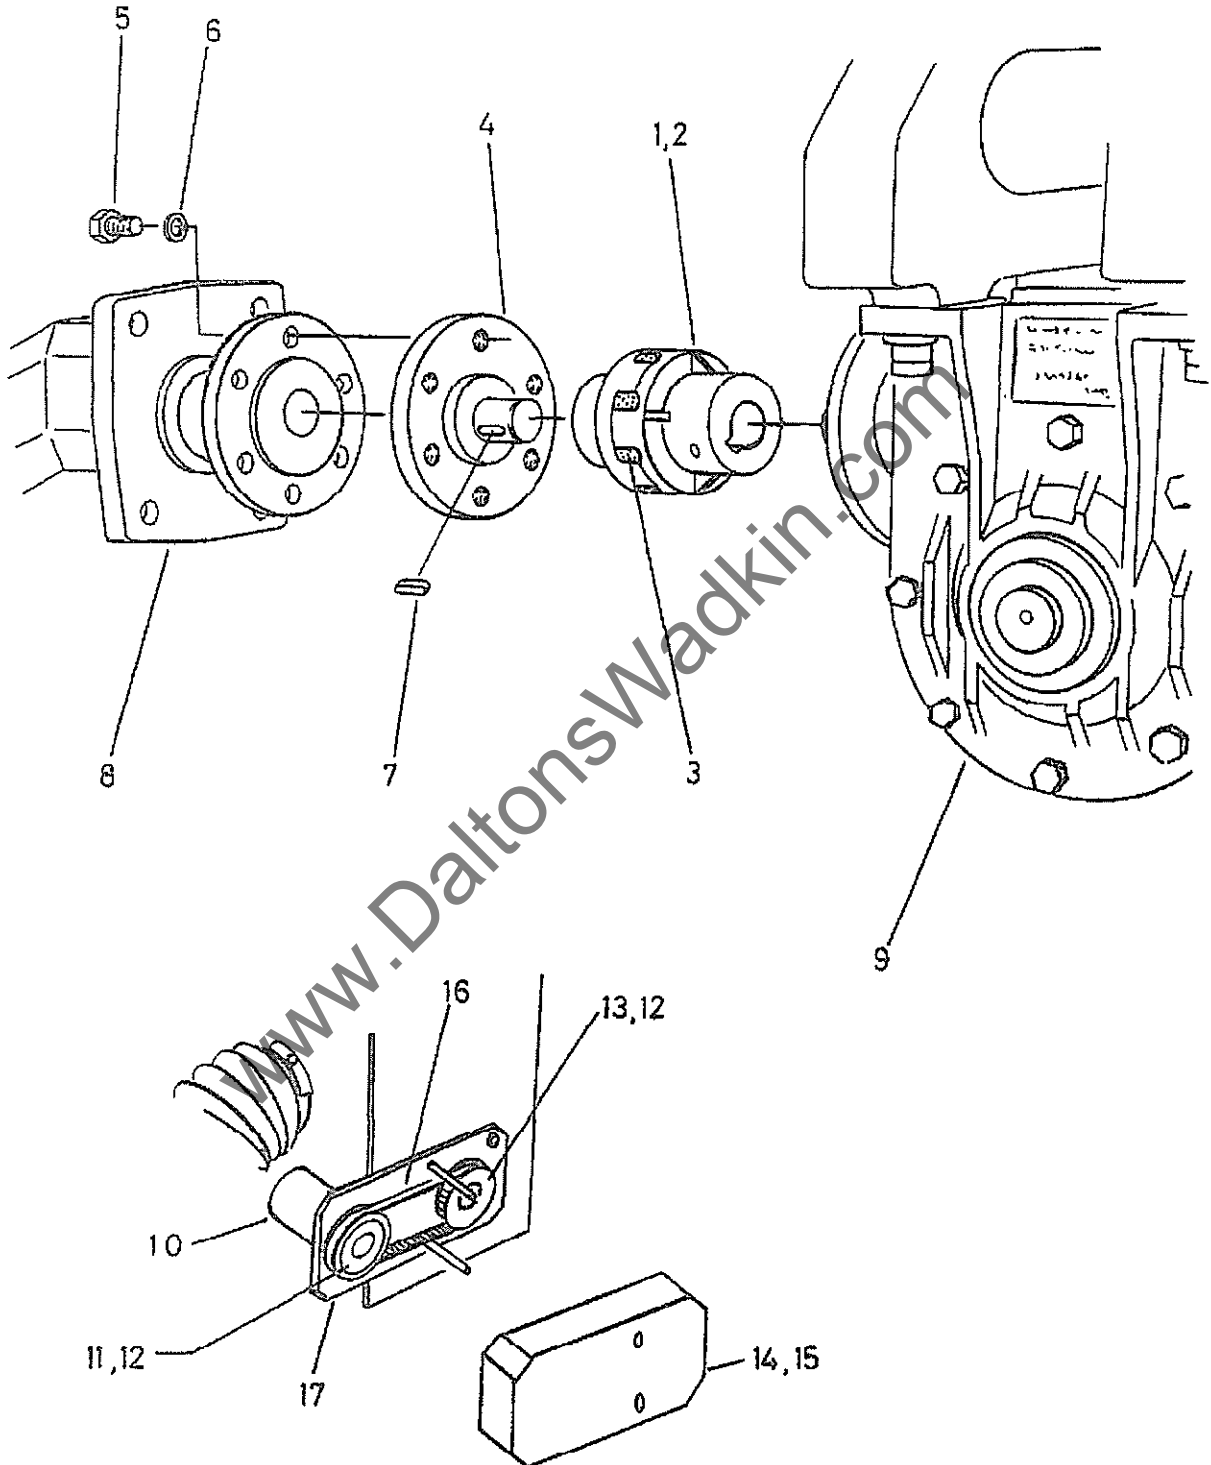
DIRECT HYDRAULIC DRIVE TO FEED ROLL GEARBOXES
